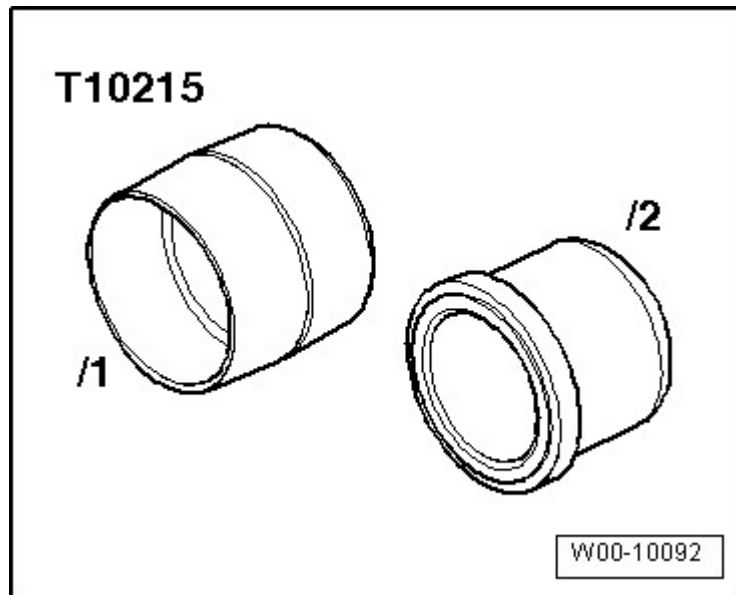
Identifying Assembly Tool T10215 For Vehicles From 11.2005
